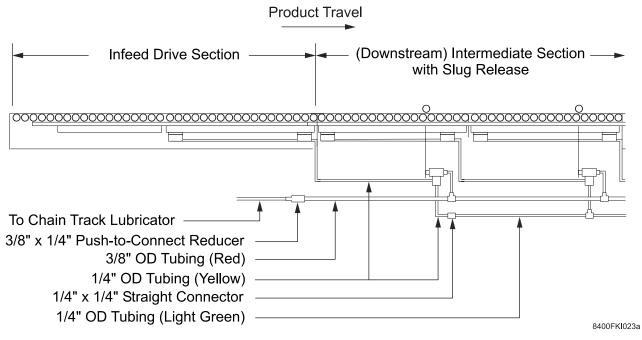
Slug Intermediate Section to Drive Section Connection
